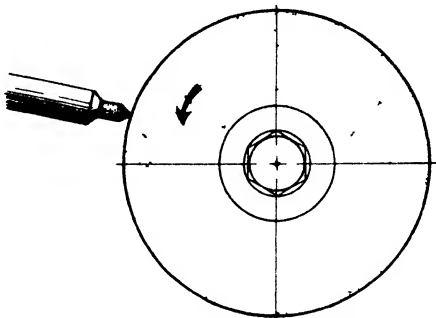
Truing a Silicon Carbide Wheel with a Diamond Dresser
